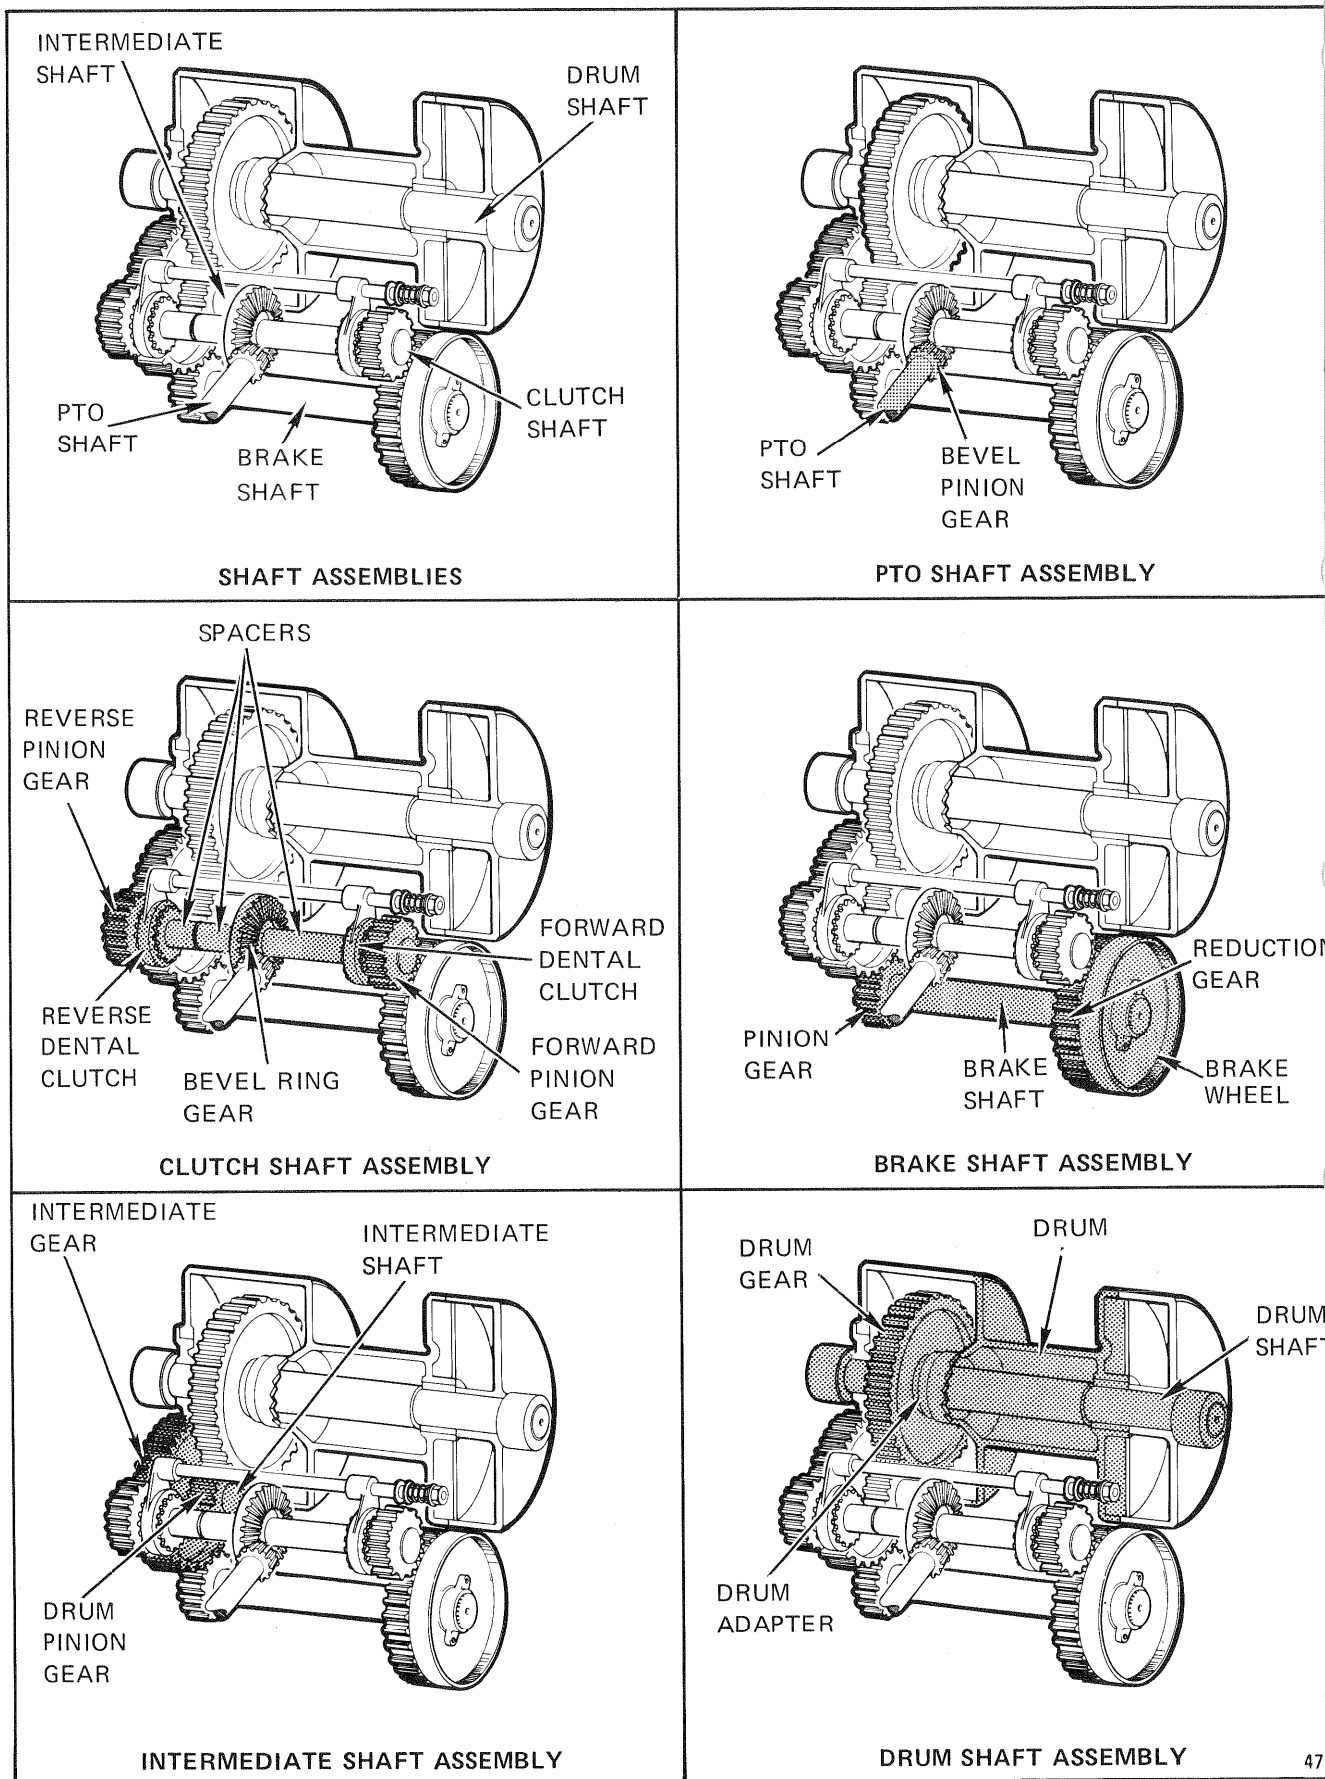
DIRECT DRIVE GEAR TRAIN, LOCATION OF COMPONENTS
